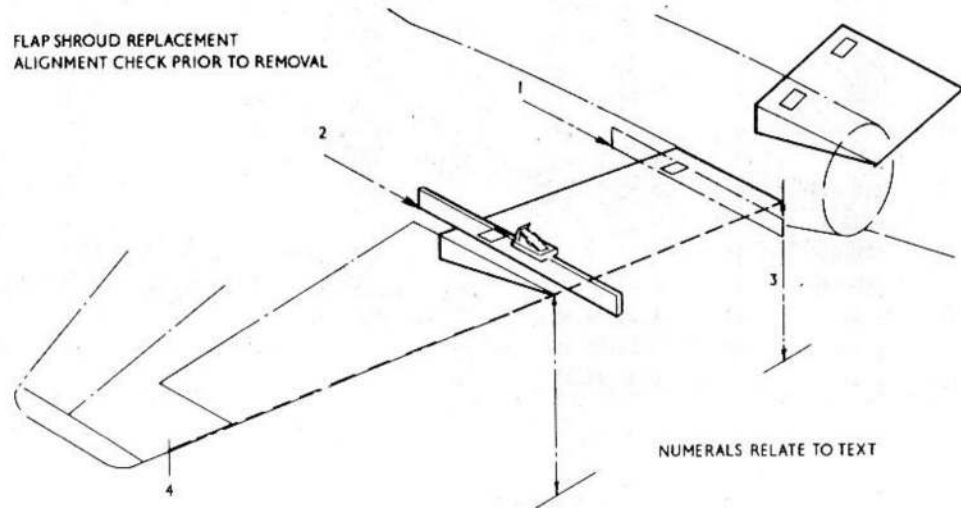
Flap shroud replacement alignment check prior to removal ▶
